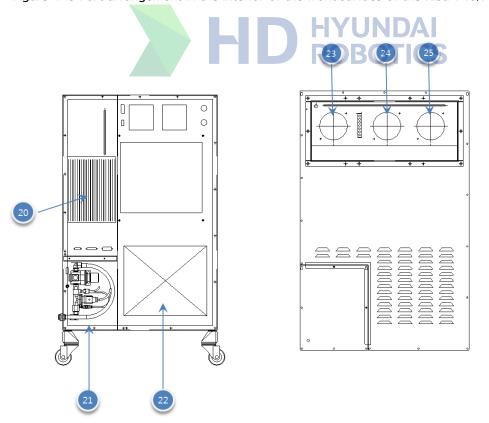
Hi5a-P10/P20 Part layout cover and on the back side of controller
